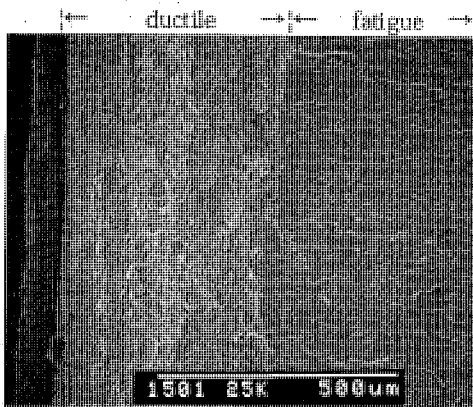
Fracture surface of IA-T specimen near the phase boundary.
